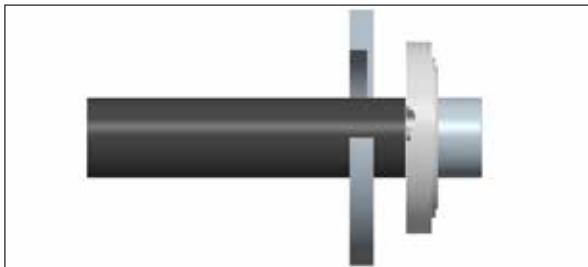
Step 1: Shorting the outer pipe with a special planing tool. This process is not necessary for the fittings
